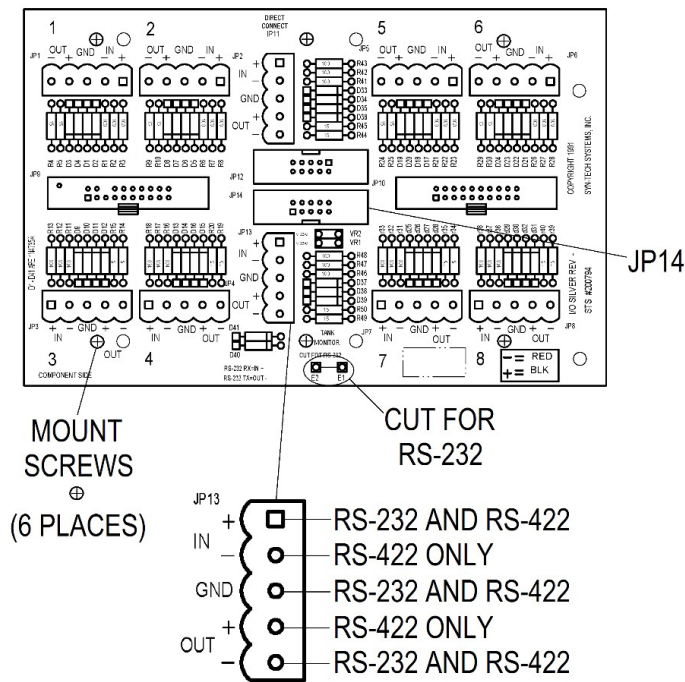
I/O Silver Board for Tank Monitor Interface Kit
